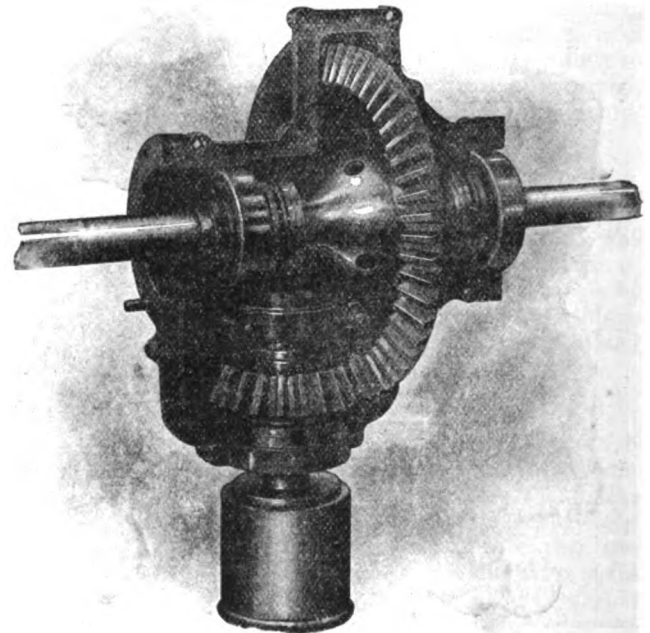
View of Bevel Gear Drive, with upper half of case removed, on Hotchkiss Six-Cylinder Car.
